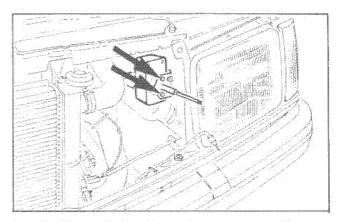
Nearside headlamp wiper motor mounting nuts
